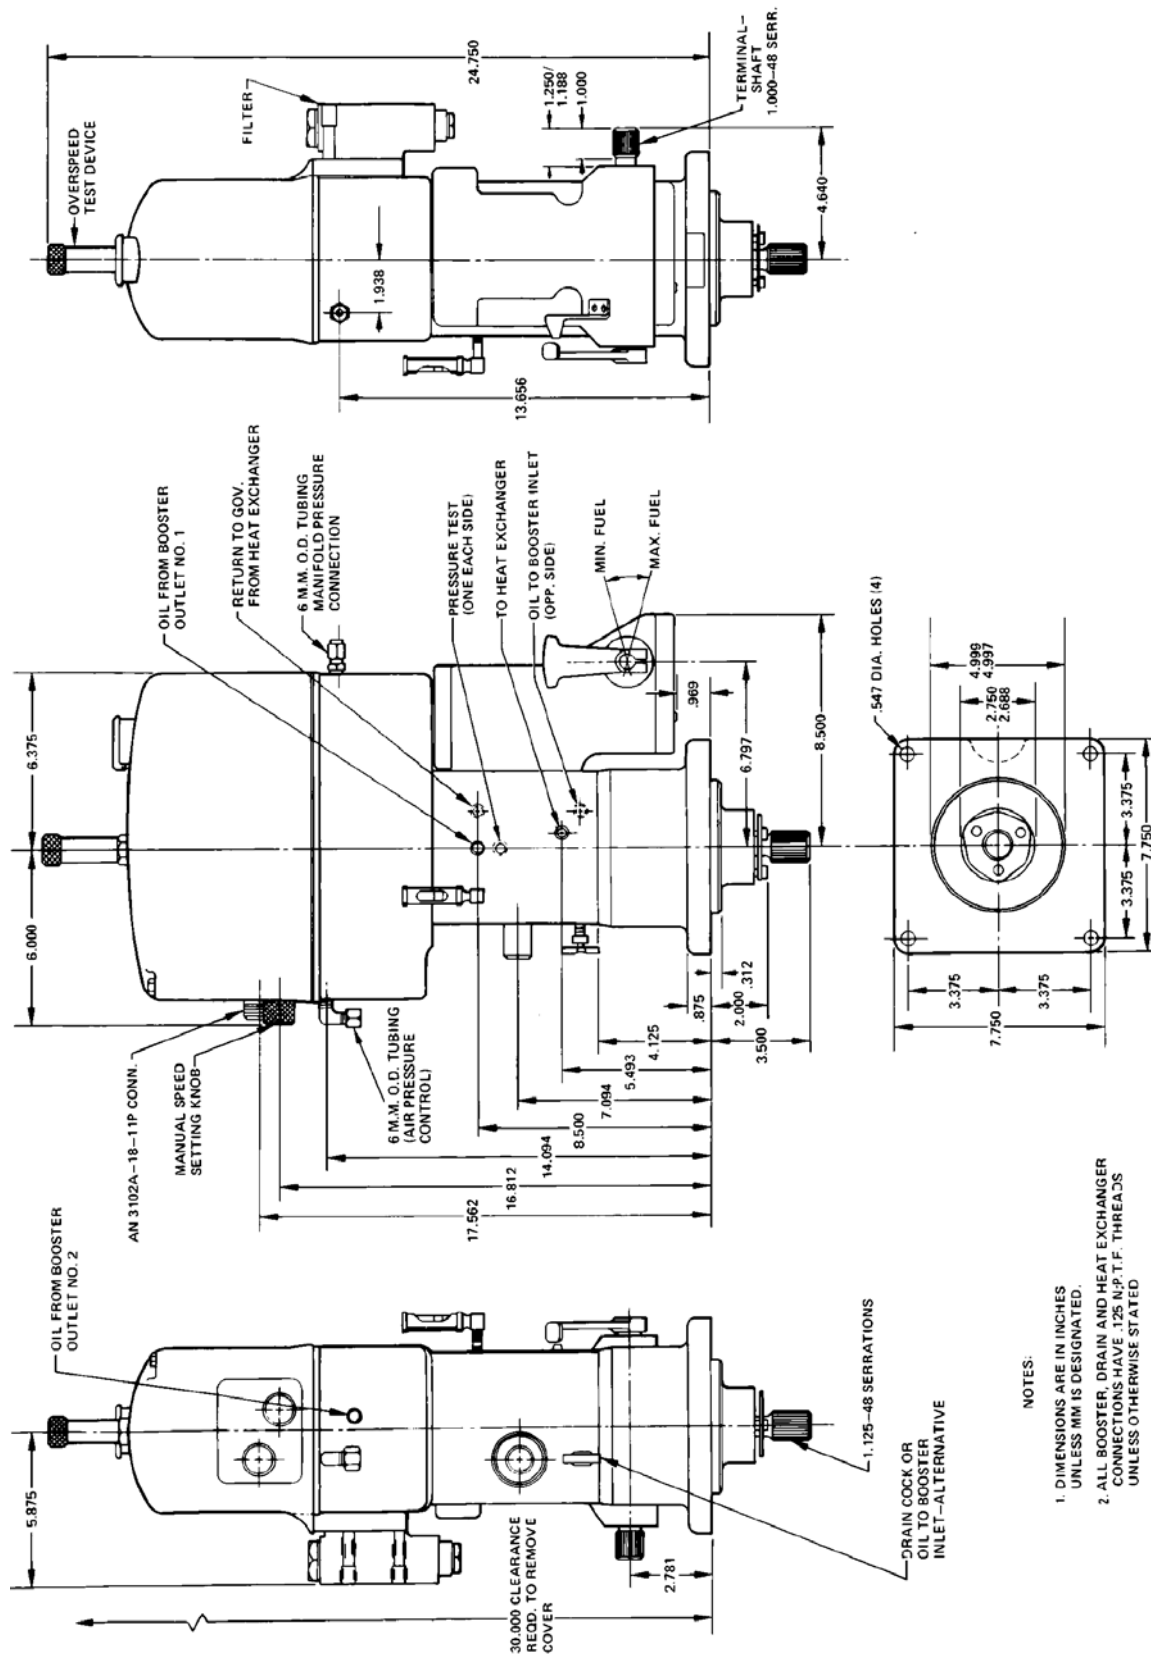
Outline Drawing of PGA with 58 ft-lb Rotary Output and UG-40 Base
